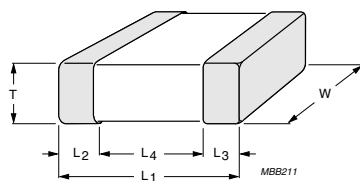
Surface mounted multilayer ceramic capacitor dimension
